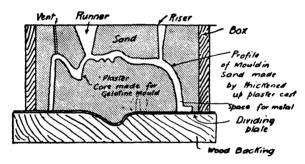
Type-metal Mould for Doll's Head: Obverse Mould
